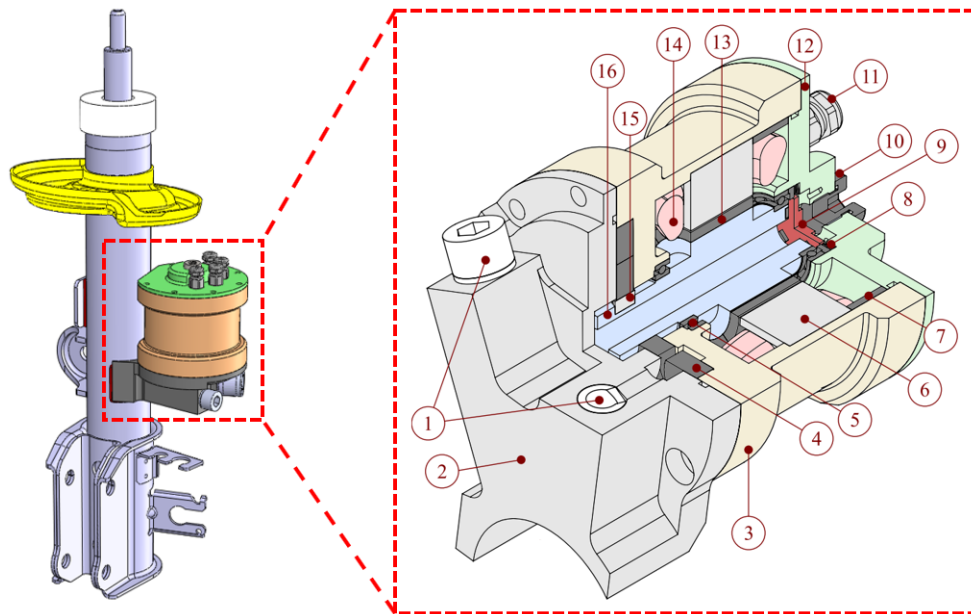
Isometric cut view of the motor-pump unit. Pump port plugs (1), pump cover manifold (2), casing (3), gerotor gears (4), ball bearings [ $\times 2$ ] (5), stator (6), motor spacer (7), wave spring (8), position sensor (9), drain cap (10), cable gland [ $\times 4$ ] (11), motor cover (12), permanent magnet [ $\times 10$ ] (13), winding coil [ $\times 6$ ] (14), key (15), rotor shaft (16).
